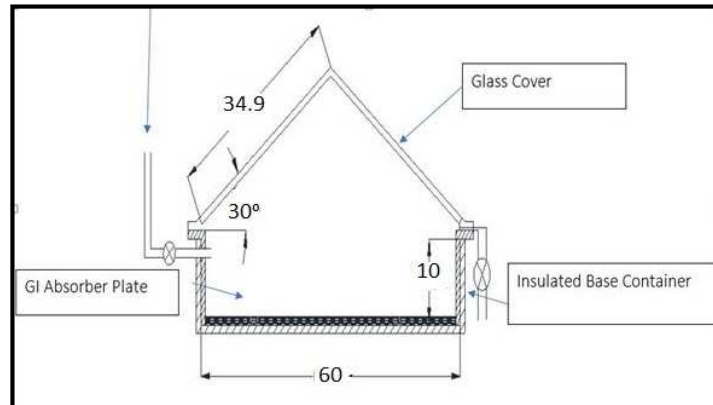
Construction Details of Base Solar Still (All Dimensions in cm)
